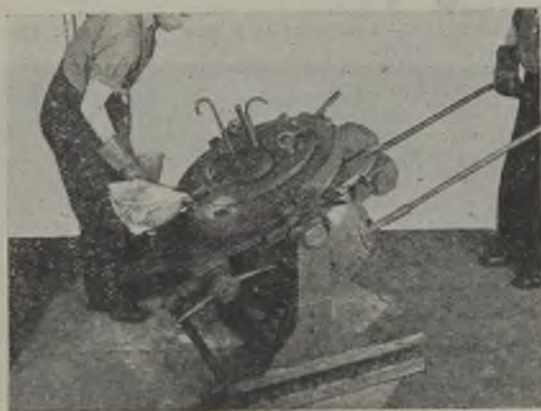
METHOD OF POURING FRONT GEAR CASE COVER.
